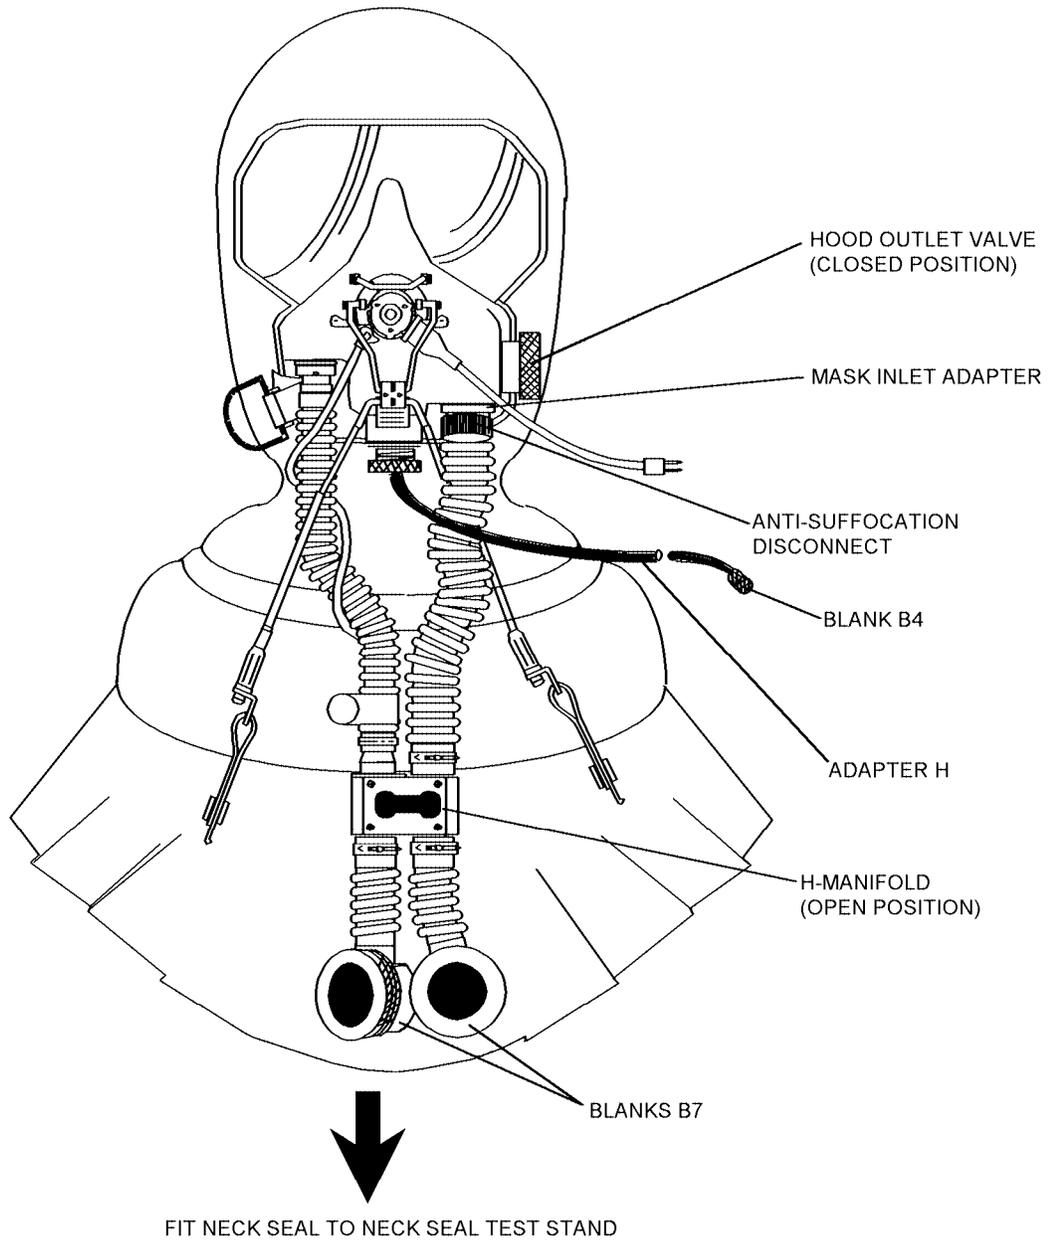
(V)2 thru (V)4 Variants - Mask Assembly - Overall Leakage Test
